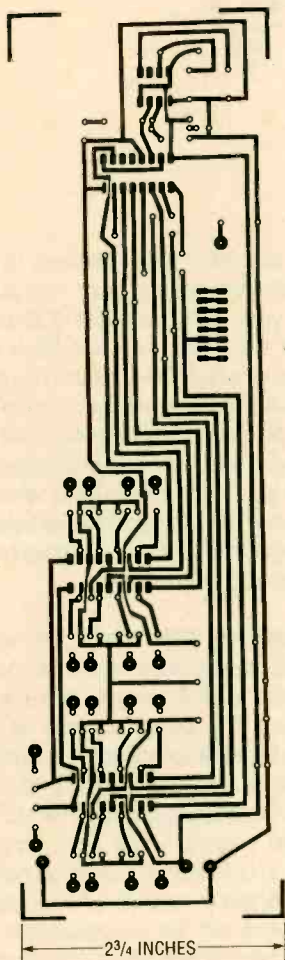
Here is a half-size printed-circuit pattern for the switcher. The circuit board is a little larger than necessary for the simple circuitry of the project, but that allows plenty of maneuvering room for soldering and drilling mounting holes.
